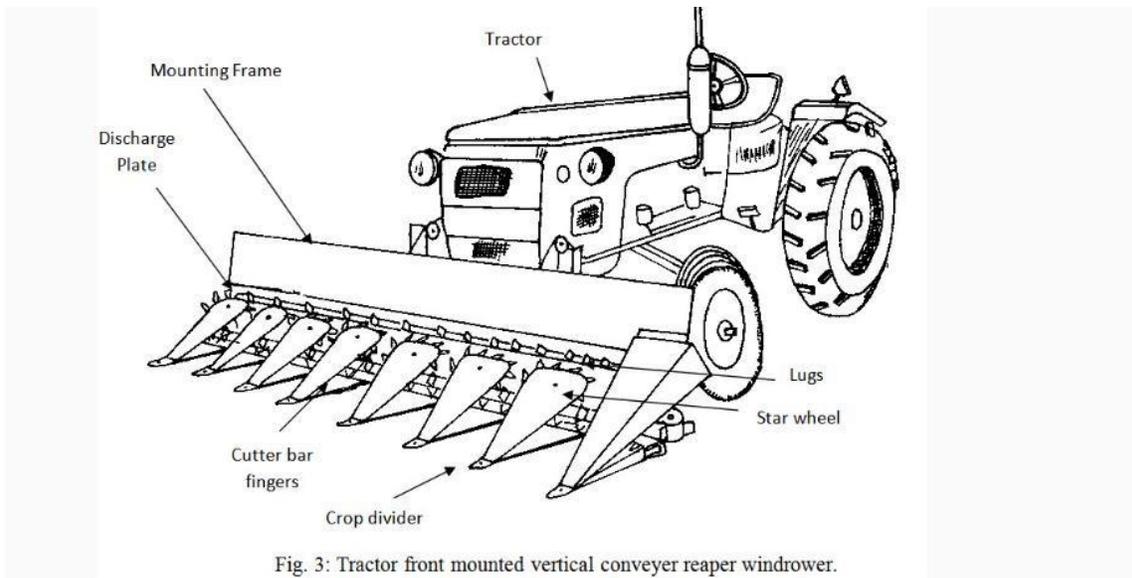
Tractor front mounted vertical conveyor reaper windrower.
